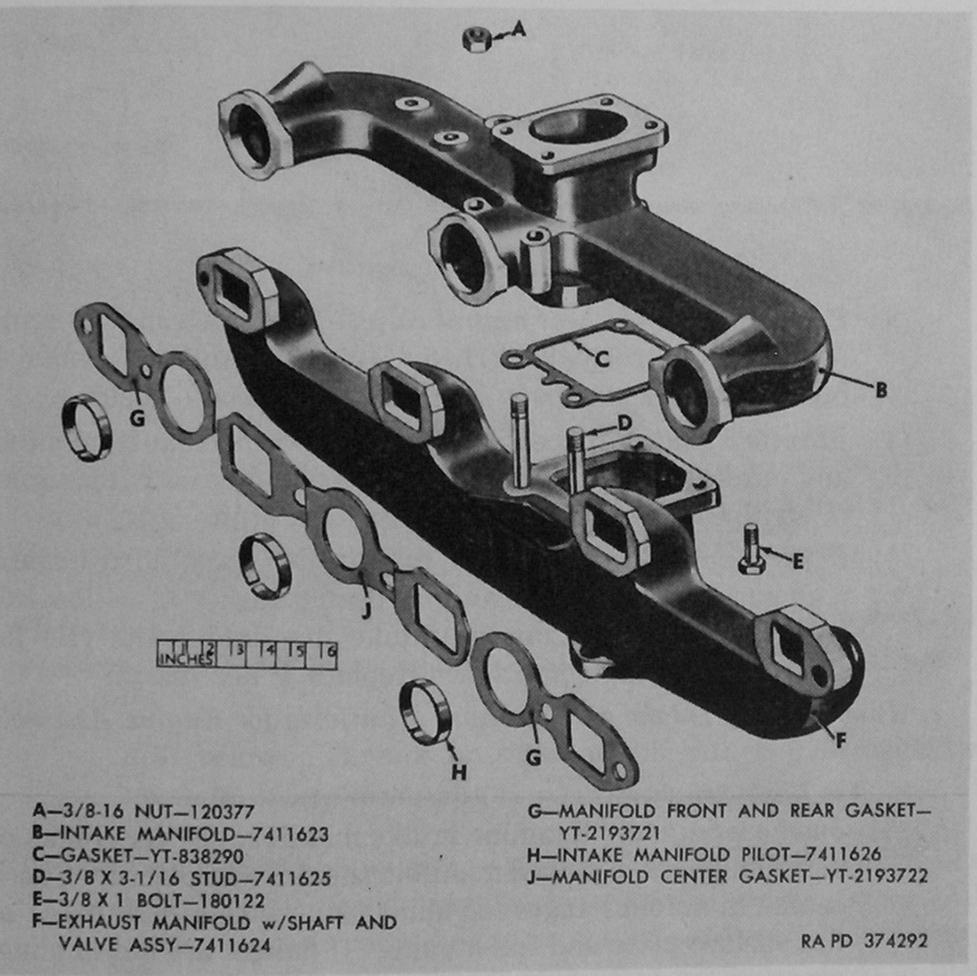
Intake and exhaust manifold components—engine assemblies 7411599 and 8329440.
